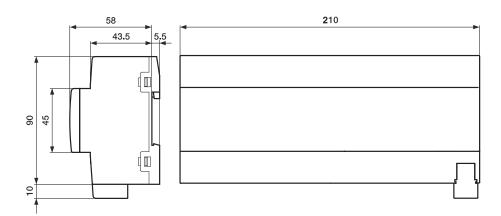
Dimensions of 12gang switch actuator MDRC (specifications in mm)
